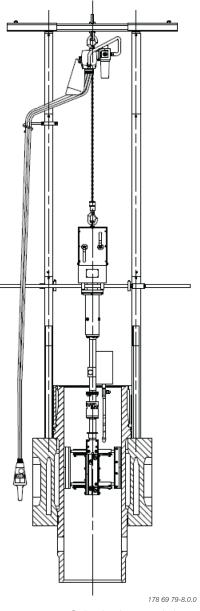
The wear ridge milling machine is available for all engine bore sizes
